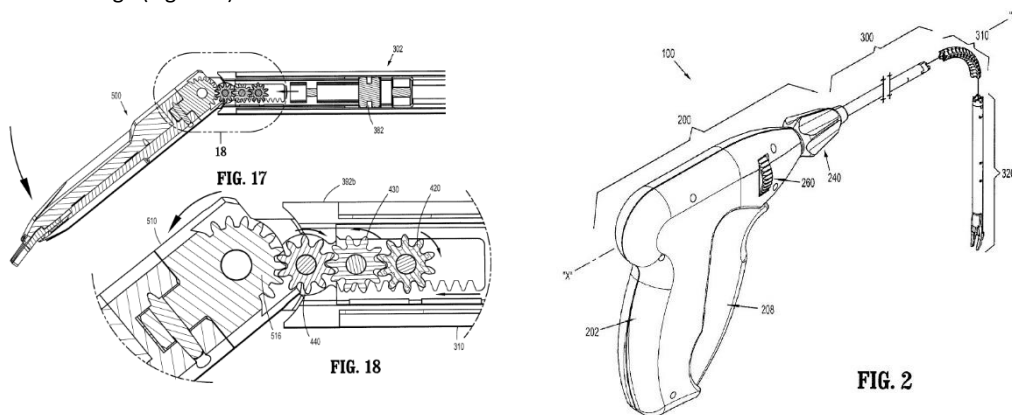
Left: drawing of the device as presented in [21], Right: drawing of device as presented in [22]
